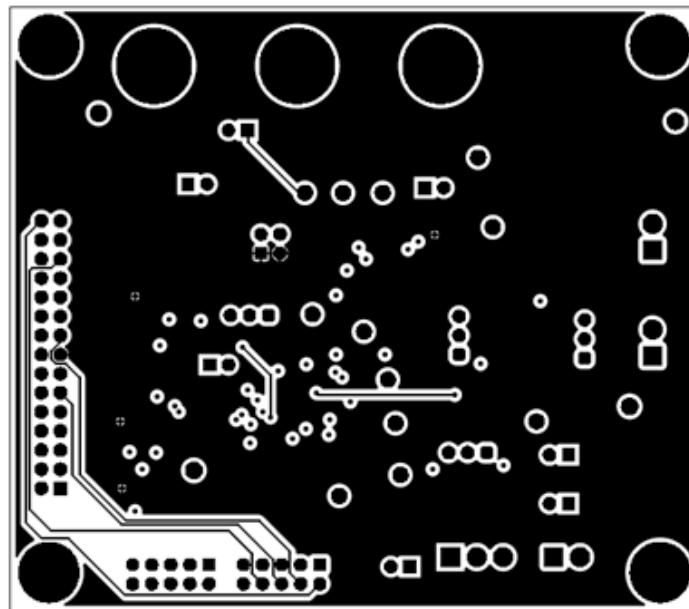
AFE881H1EVM PCB Mid Layer 2 Layout
